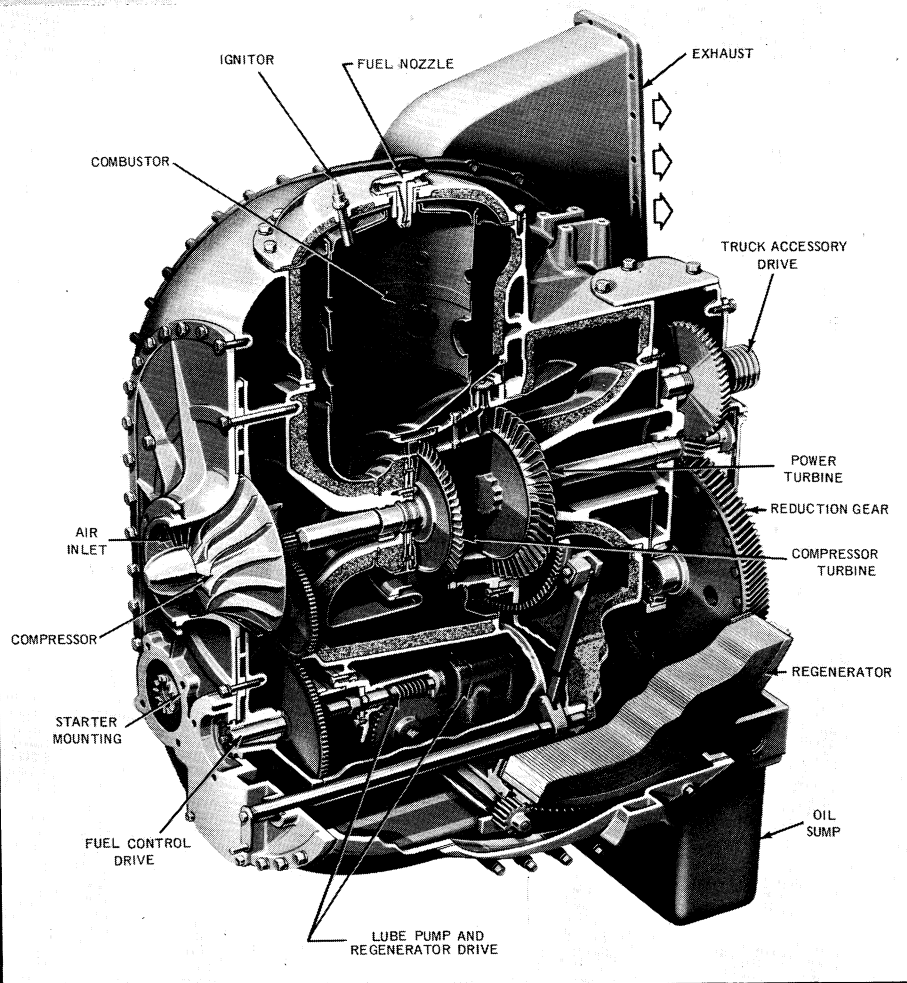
Cutaway view of 375-hp gas turbine engine, right, shows relative simplicity of design and location of reduction and accessory drive gear described here. Courtesy Ford Motor Co.
